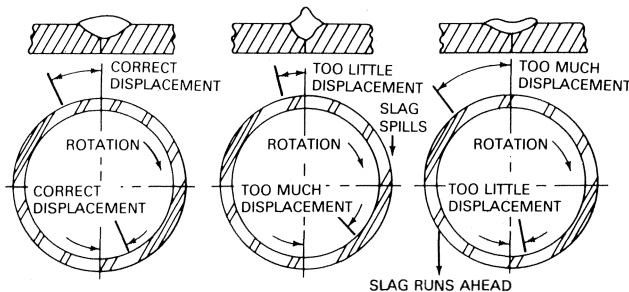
Sketch Showing Positioning of the Welding Arc for Circumferential Welding [24].
